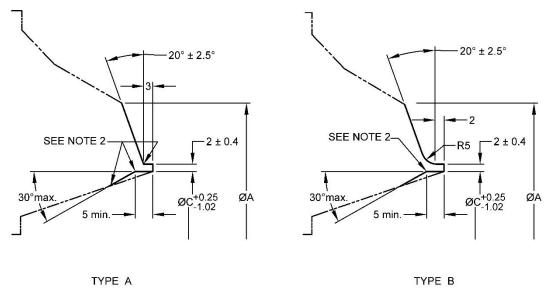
WELD BEVEL DETAILS INTENDED FOR USE OF GAS TUNGSTEN ARC ROOT PASS WELDING OF NOMINAL WALL THICKNESSES OVER 3 mm to 10 mm Inclusive
